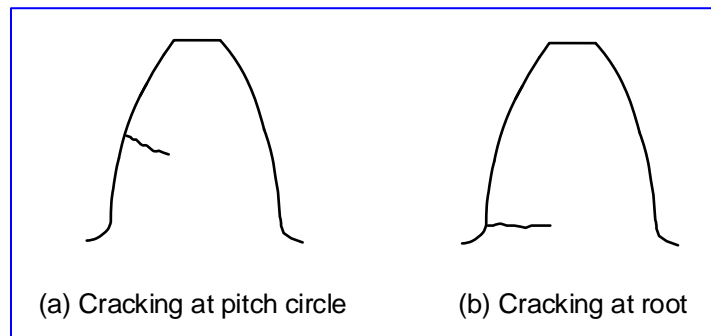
Fracture forms of plastic gears (after [26])
